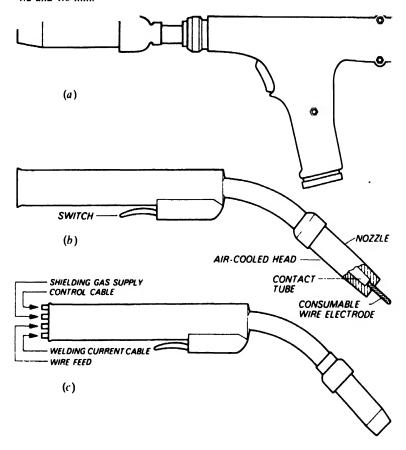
(d) MIG welding guns: 600 A, 400 A, 300 A.
